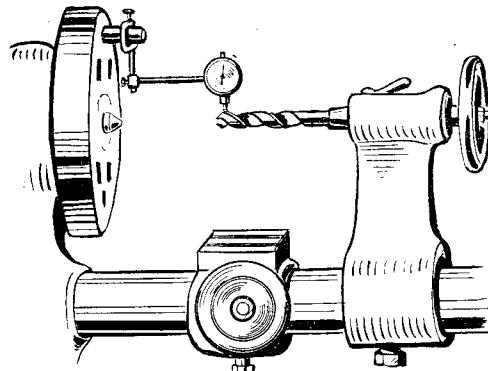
A simple method of checking the alignment of the drill when fitted to a lathe tailstock
